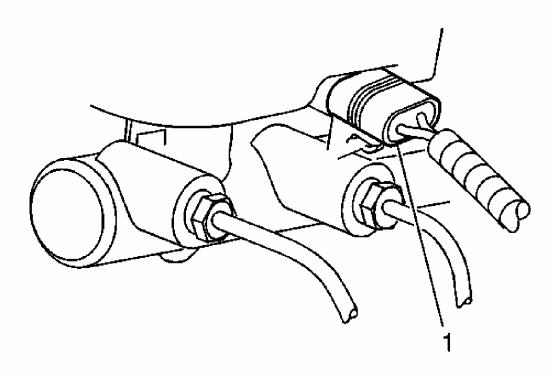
View Of Brake Fluid Level Sensor Electrical Connector Courtesy of GENERAL MOTORS CORP.
